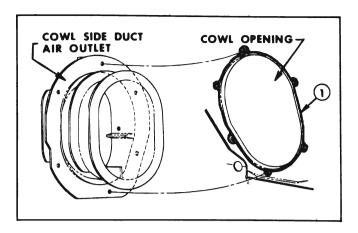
Cowl Side Duck Air Outlet Sealing
